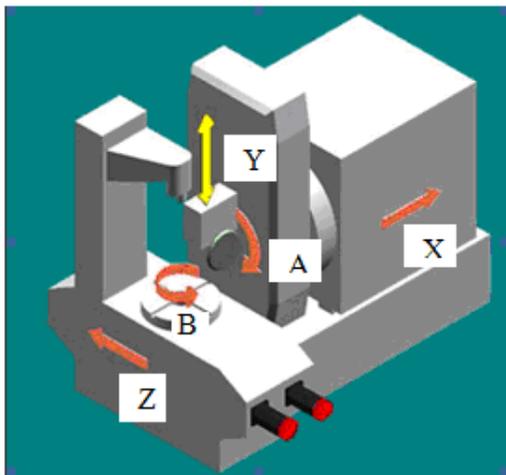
The orientation of the coordinate axes of the CNC gear grinding machine
